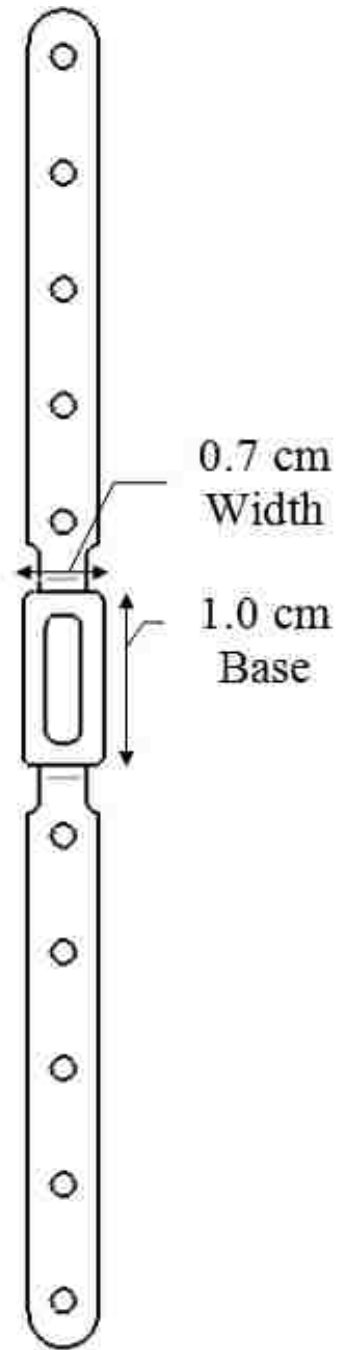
Top View. Bi-Cantilevered Drain/Cantilever composed of a Rectangular Drain and two Rectangular-shaped Cantilevers attached to the Width.
